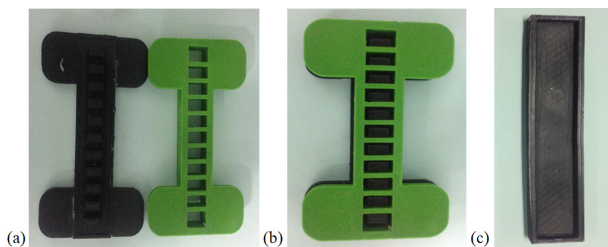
3D printed molds for fabrication of pneumatic actuators: (a) upper and lower molds (b) upper and lower molds fitted together (c) Base mold.
